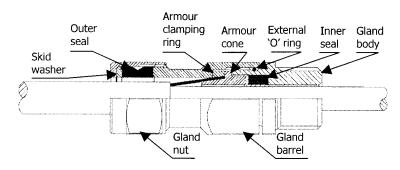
Sectional Drawing of a Typical RTFL-S Gland
